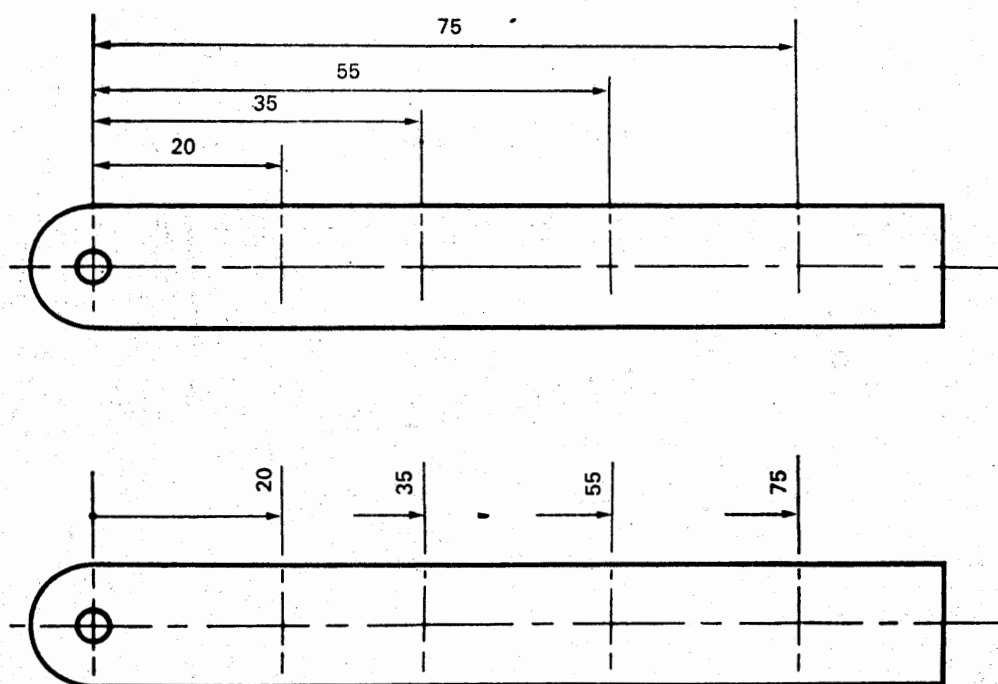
DIMENSIONING FROM A COMMON DATUM
